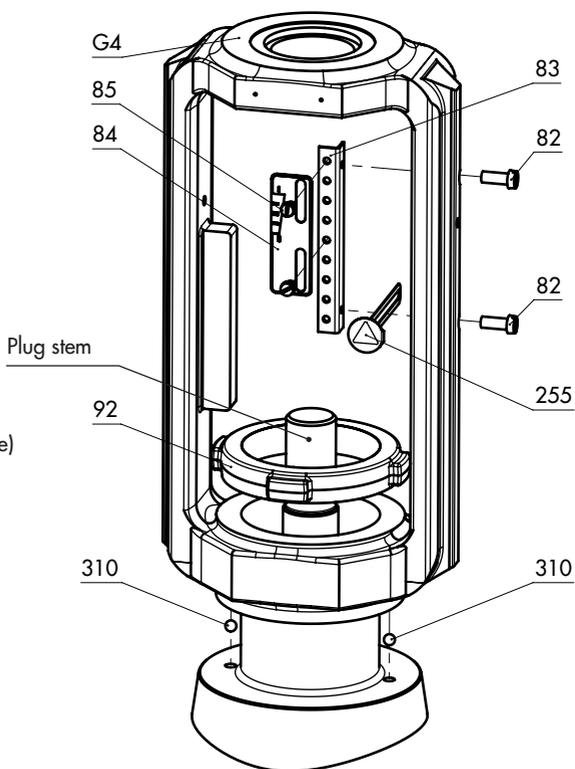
Overview of yoke assembly with travel indicator scale in the standard version
